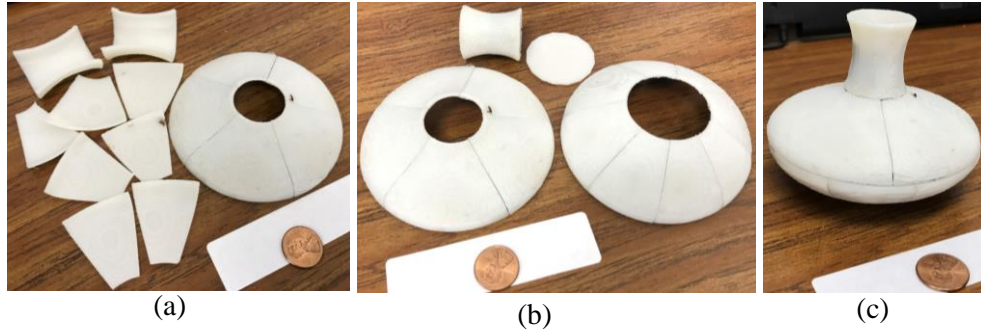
(a-b) Fabricated grains and assembling them together, and (c) final flower vase after assembly.
